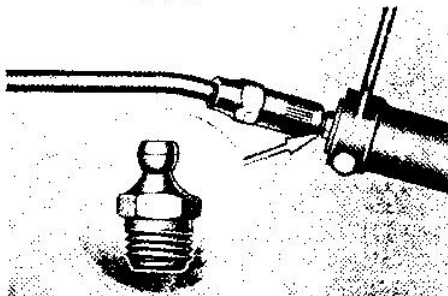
Model 6594 Gun used on Hydraulic Fitting.
